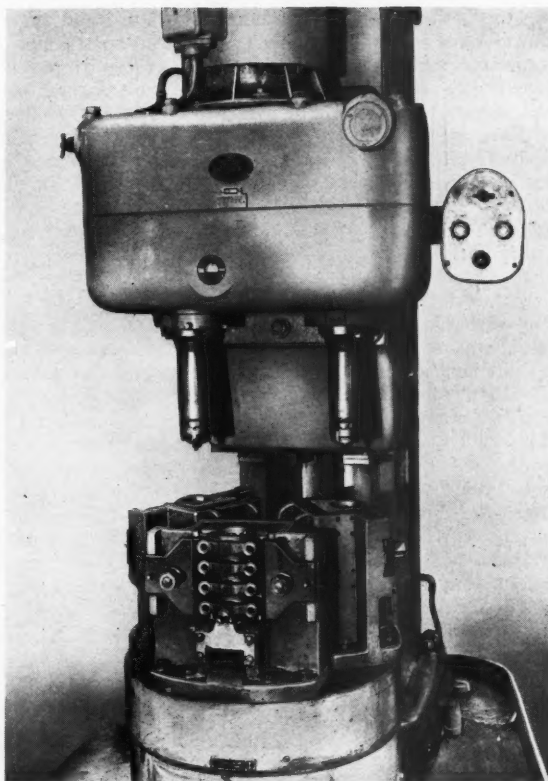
The set-up for rough and semi-finishing the half-bores of composite bearing cap castings.
